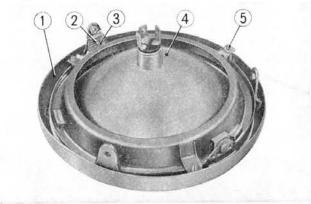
① Headlight rim ② Headlight beam unit ② Cotter pin ③ Adjusting screw
